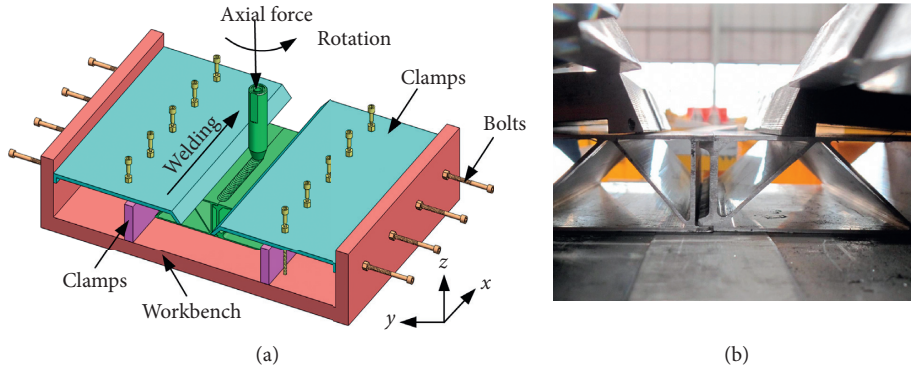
High-speed friction stir welding process. (a) Schematic view; (b) experimental setup.
